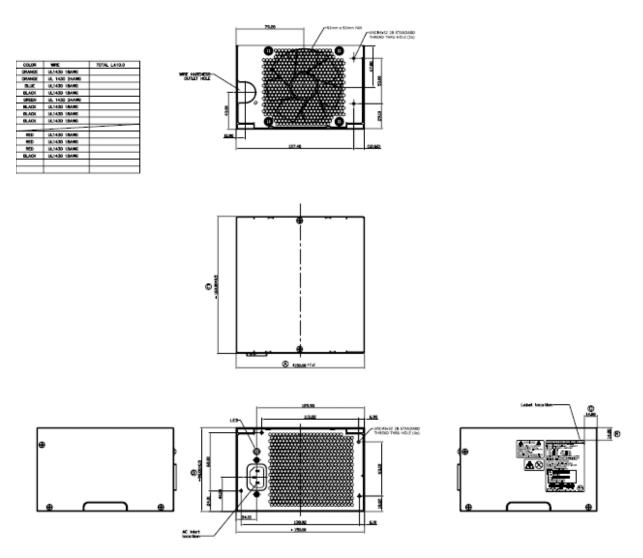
Mechanical Drawing for 550-W Power Supply Enclosure
